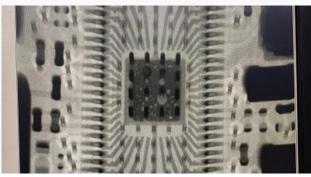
Inspection of BGA using X-ray[2]
